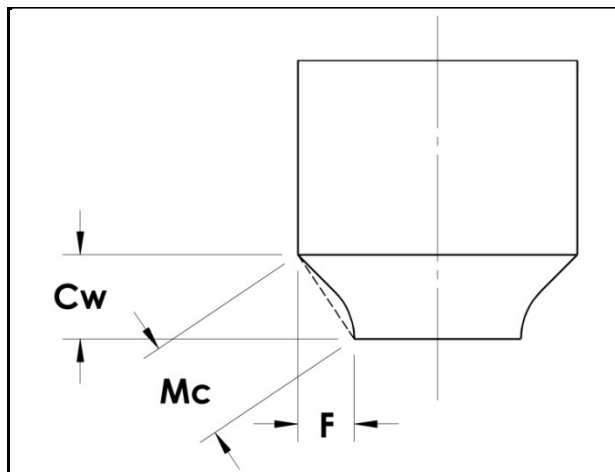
Length from Weld Root to Weld Toe on Coupler (When $C_w > J$)
